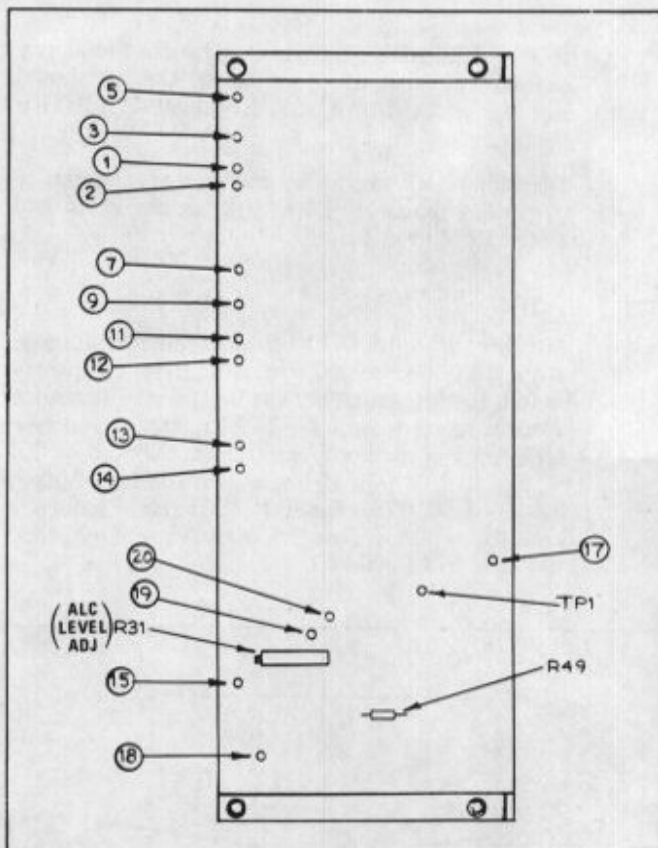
Trimmer Locations, Divider/ALC Assembly, A1A2
